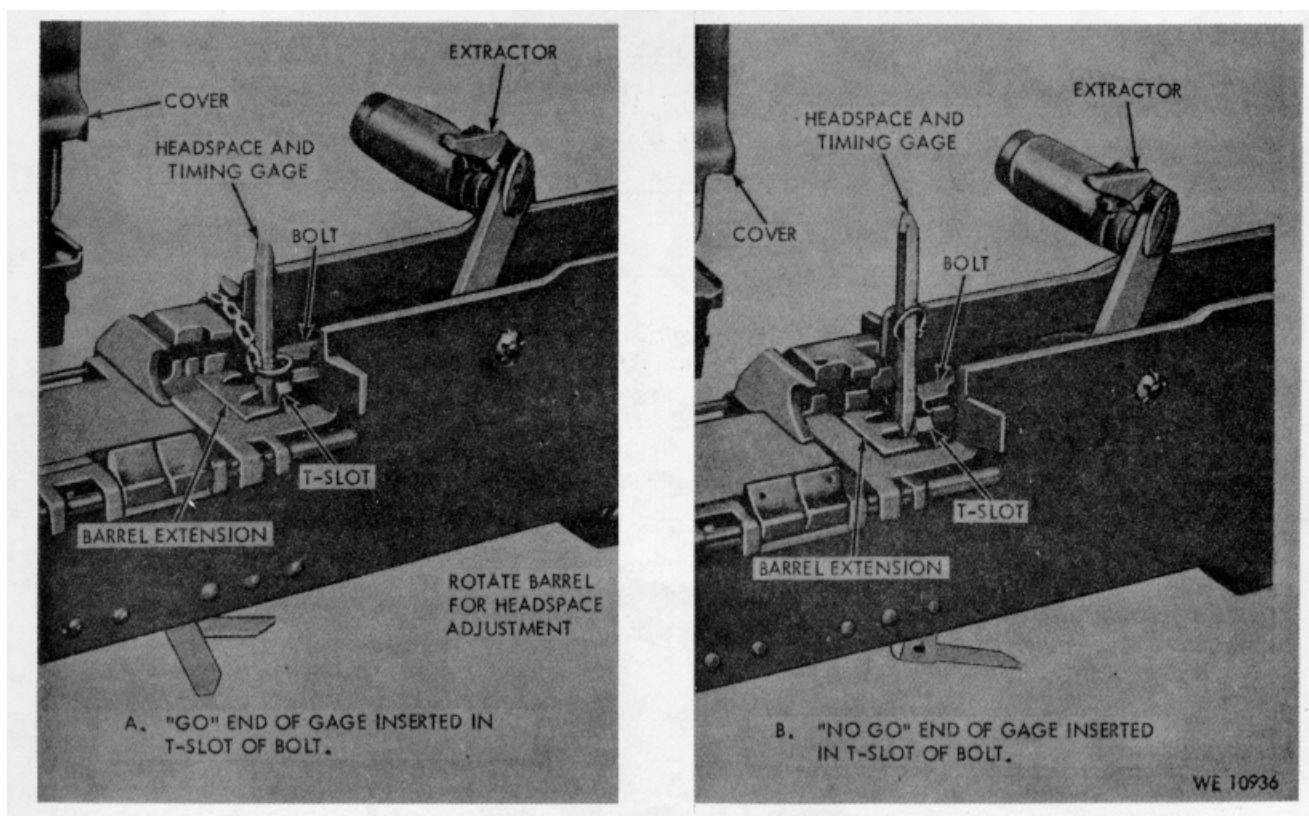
Checking and adjusting headspace on cal. .50 machine gun, M2, HB
